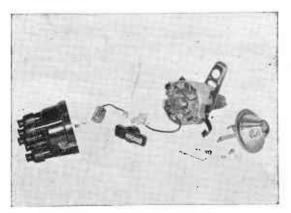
Removing Cap, Rotor and Vacuum Controller
